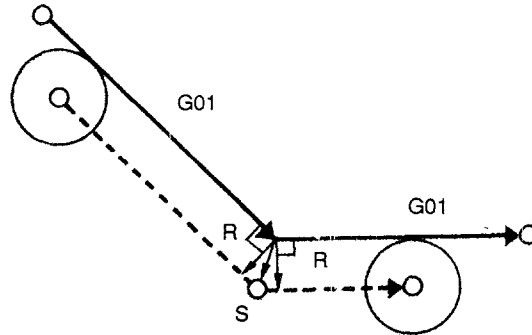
Offset Motion (Straight-line to Straight-line)
